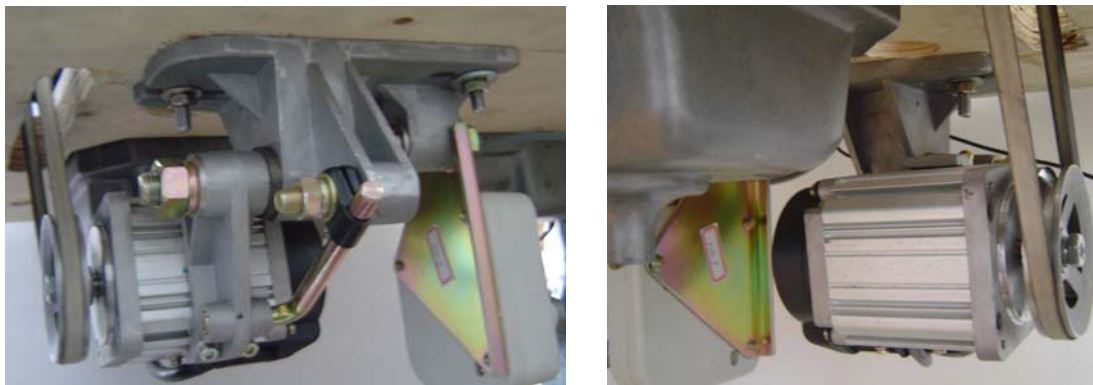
Illustration drawing of motor under hitch for general interlock sewing machine applicable for ASU50 control system
